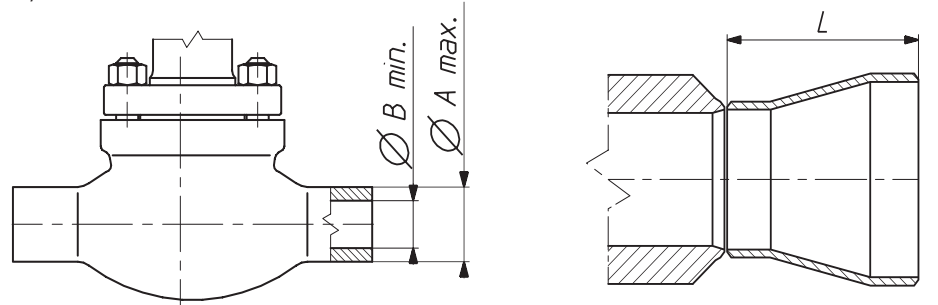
External and Internal Diameters with Dimension for reduction stub
